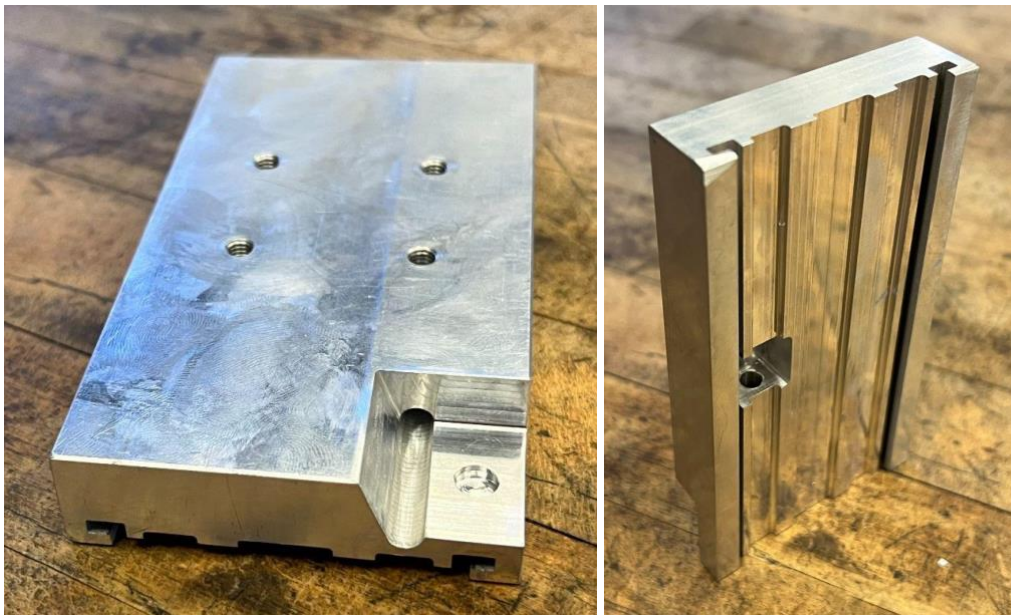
Top and Bottom View of Completed Tech Toe Plate Component
